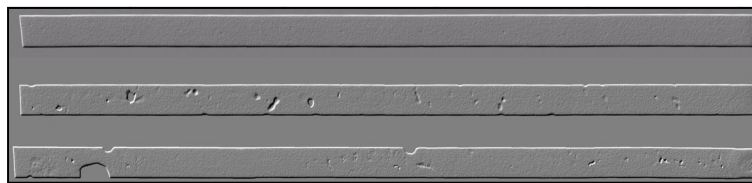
X-Ray Inspection of Solder Test Specimens (Good and Bad Samples)
